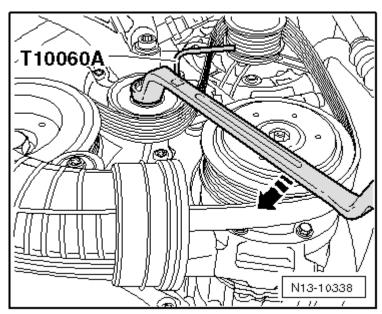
Identifying Wrench And Locking Pin -T10060 A-
